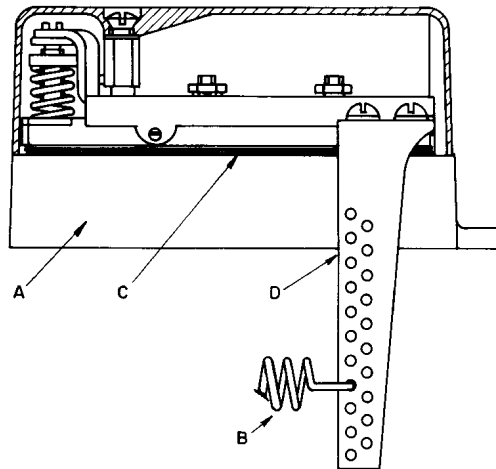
D-9502 Pneumatic Damper Actuator Positioner
